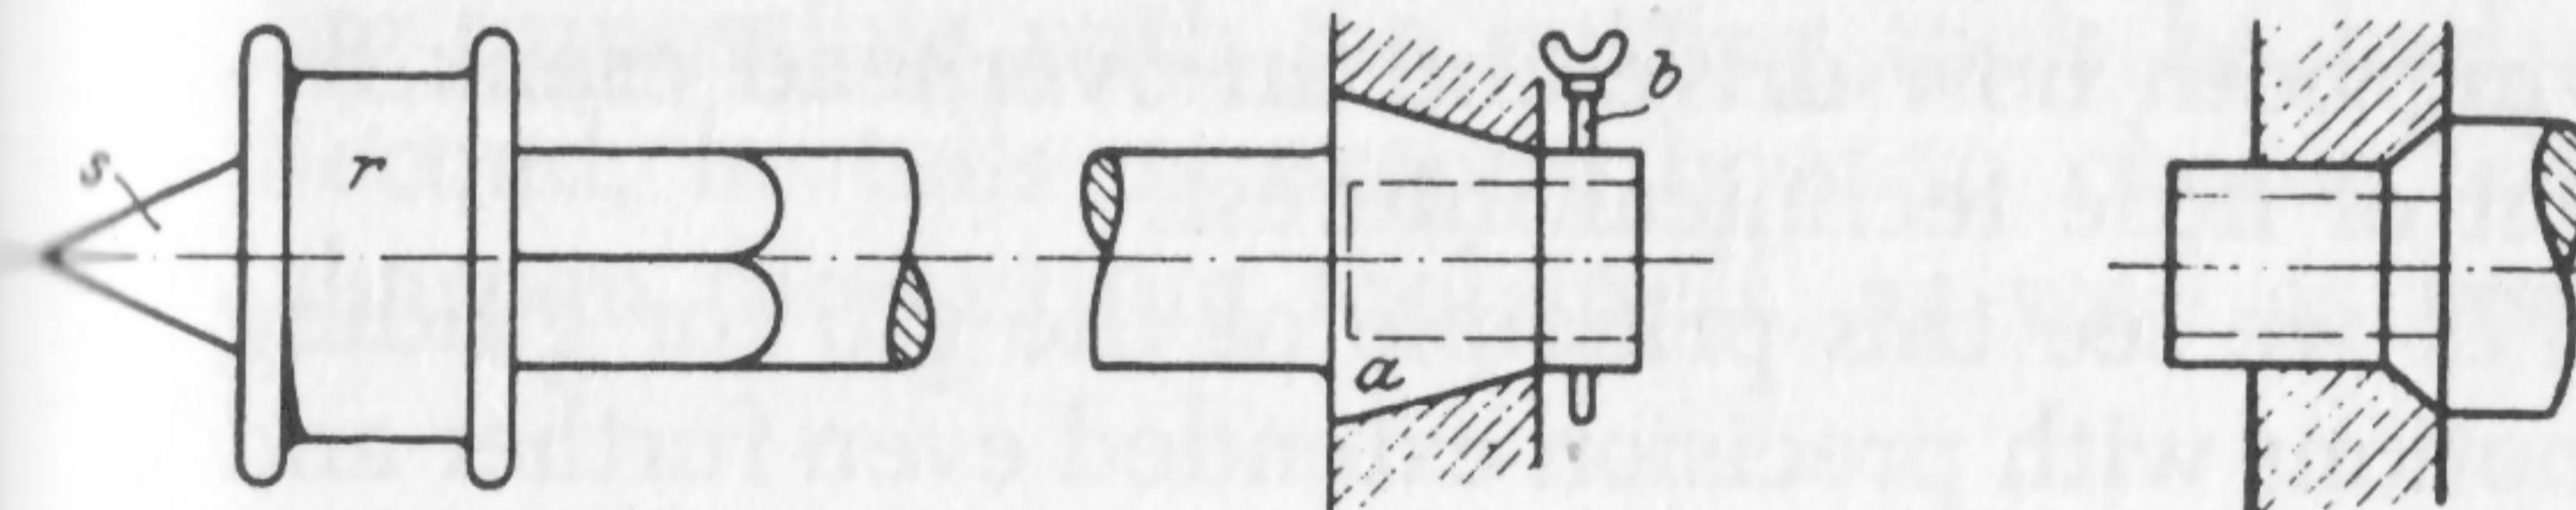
THE FIRST CONICAL LATHE SPINDLE BEARING, 1671.
